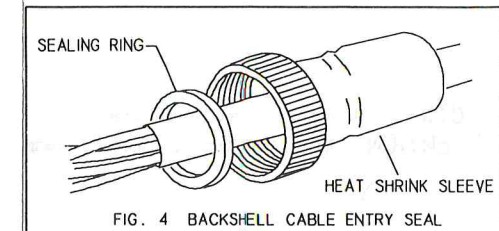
BACKSHELL CABLE ENTRY SEAL
